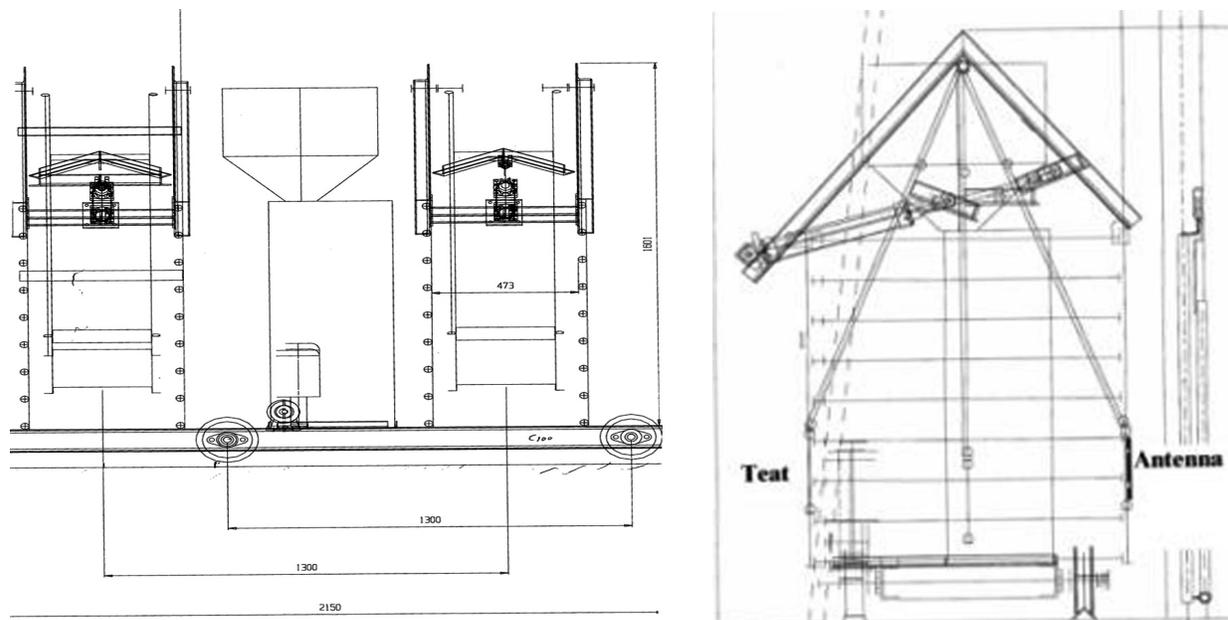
Materials and methods. Mechanical design; a front view (left-side drawing) and a side view of a milk-feeder stall (right-side drawing) of the powder milk feeder and its two stalls. Each pen had one stall with one teat, connected to the computer-controlled unit that was located between the two pens. The entire system was located on four wheels and rails, it could moved automatically between the pens. During the experiment up to 25 calves was kept in each pen, but the system is capable to hold up to 50 calves per pen. When a calf feels hungry it learned to locate its neck tag near the RFID antenna. If the individual calf has granted a drinking permission from the computer, the gate moves towards the milking teat, pulled by the pneumatic cylinder. Before milk allocation and during dinking, the RFID antenna moved with the gate continuously verifies that the correct calf is still there, not replaced by another calf. Later after drinking, the pneumatic cylinder gently pushes the calf outside the drinking stall. This mechanical design of the drinking stall isolates the drinking calf from his yard mates and prevents a one calf blocking the drinking stall after he has completed his milk quota.
